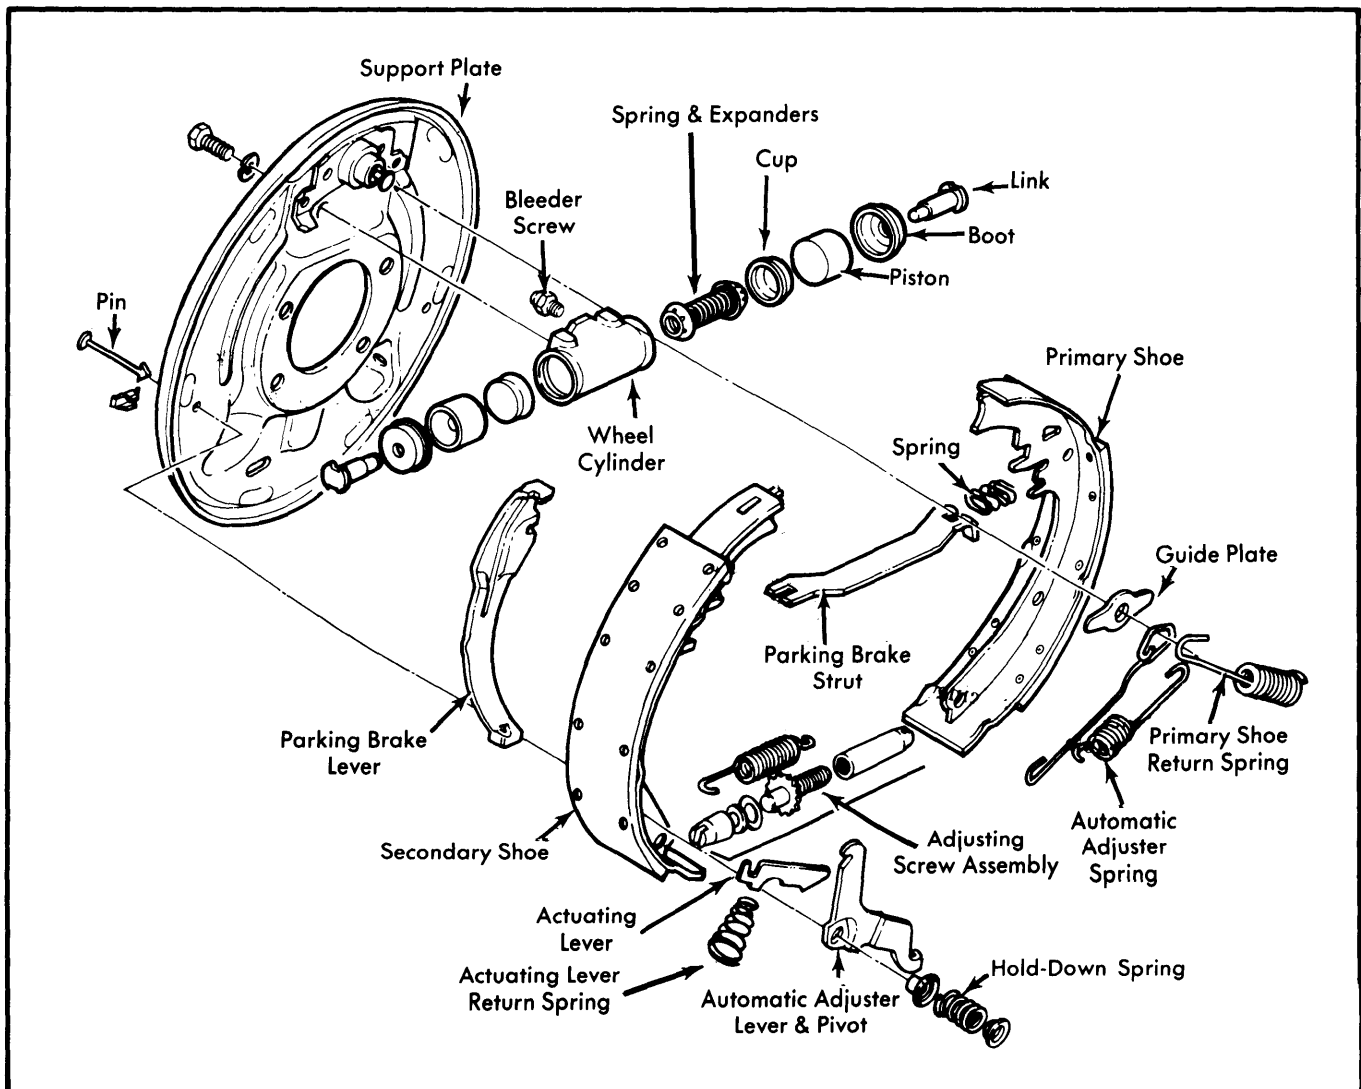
Exploded View of Jeep Drum Brake Assembly
